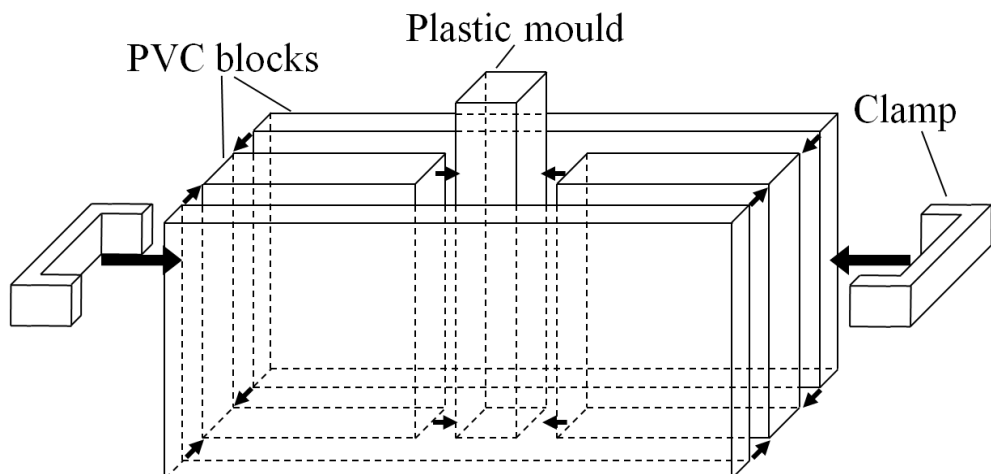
Assembled mould ready to cast UP and epoxy LSC
